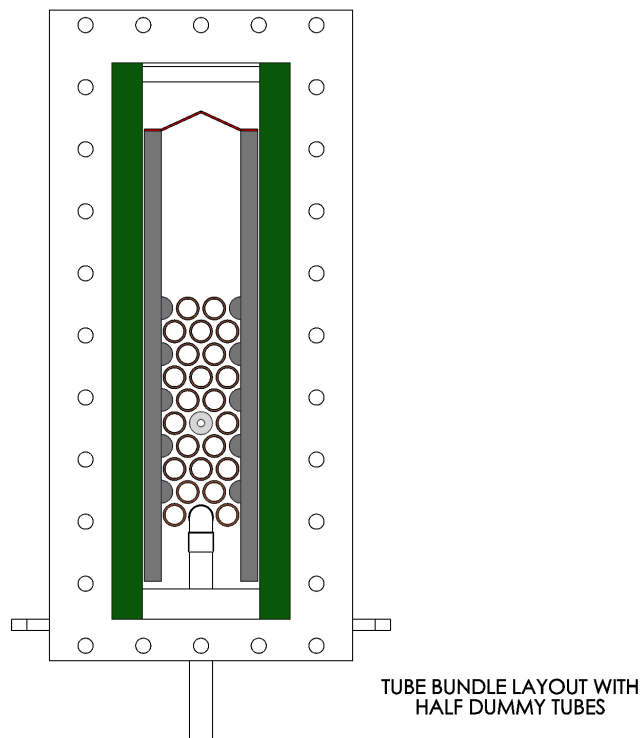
End view with tube bundle. half rounds are attached to the insert plates.
